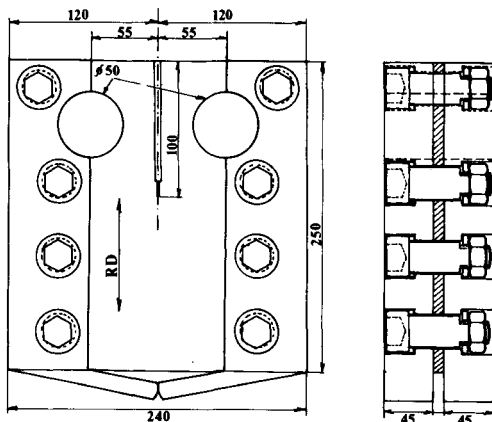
Epsen - Specimen, Provided with Stiffeners Hinge
